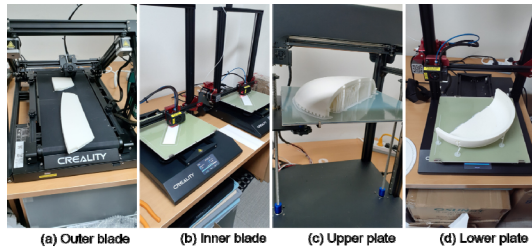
Manufacturing process of dual small wind generator using 3D printing and CNC machining
